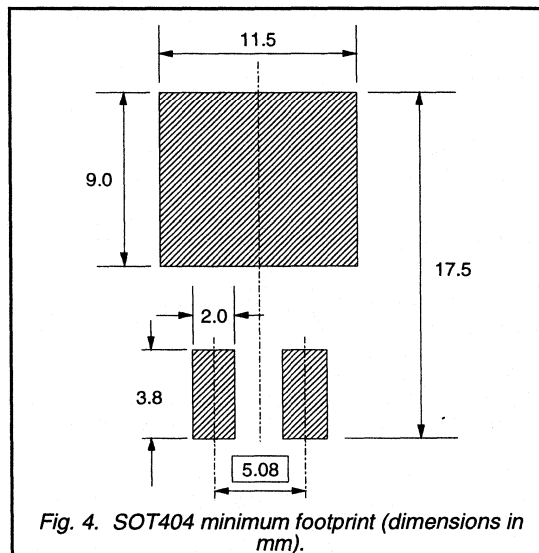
SOT404 minimum footprint (dimensions in mm).
